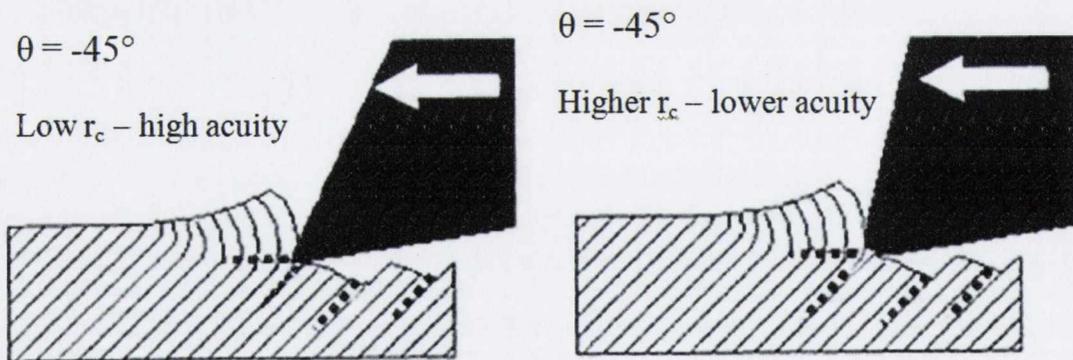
Mechanisms of chip formation during the machining of -45° UDFRP with high or low cutting edge acuity tools. (Adapted from [37])
